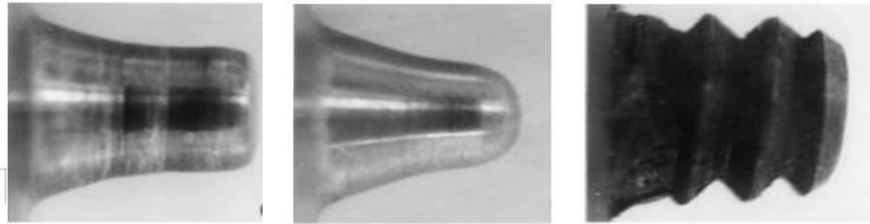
Tool Geometries (a) Cylindrical (b) Conical (c) Threaded
